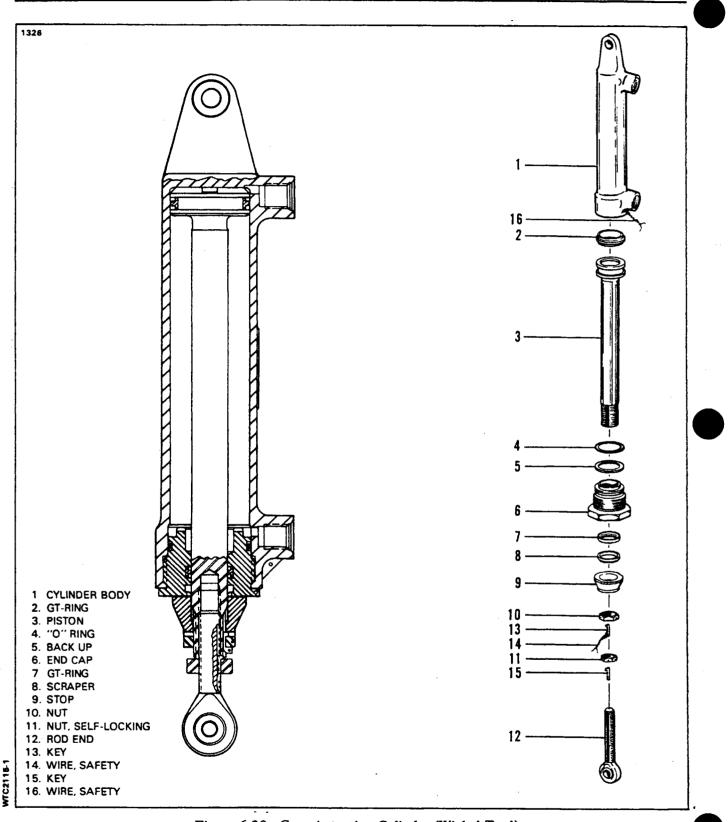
Gear Actuating Cylinder (Wiebel Tool)
